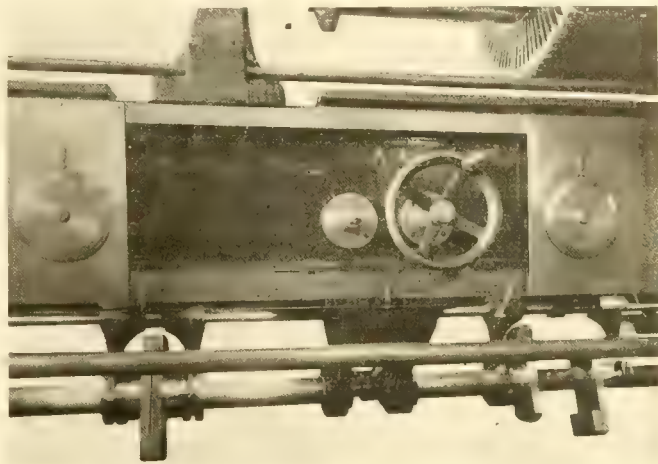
DETAILS OF CARWEN BALANCING MACHINE
